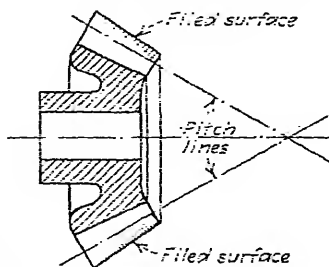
Filed surfaces of standard-depth bevel gears.
